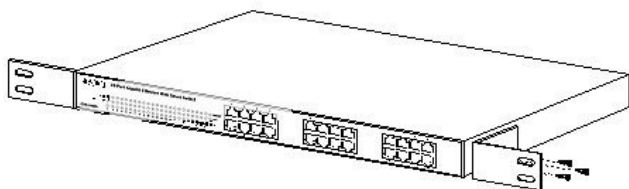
Attaching the brackets to the POE-1200/POE-2400
